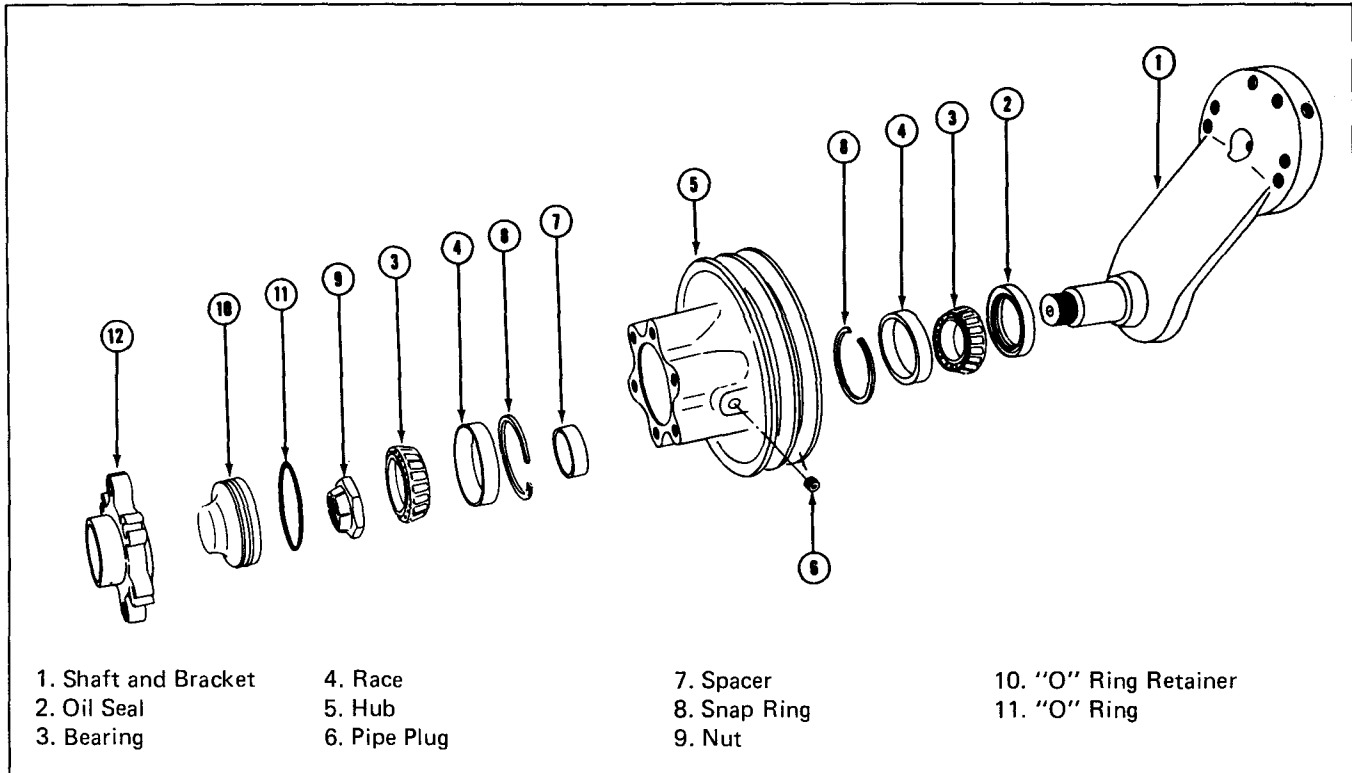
, (N10839). Fan hub assembly with tapered roller bearing and spacer
